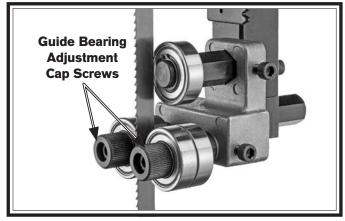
Location of upper guide bearing adjustment cap screws (guide post cover removed for clarity).
